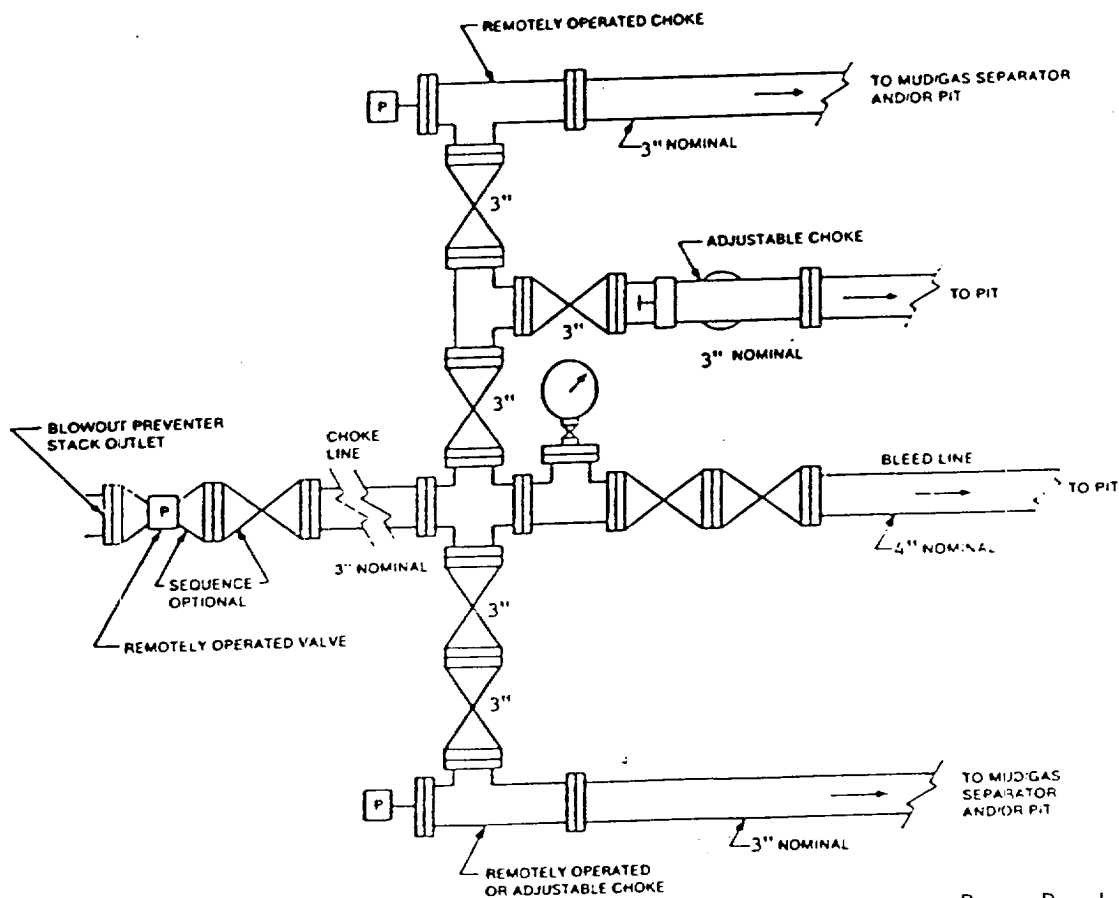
Typical choke manifold assembly for 10M and 15M rated working pressure service — surface installation.
